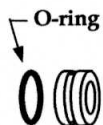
O-ring for Valve Seat "6227-14", "GC-1" Series Only.
